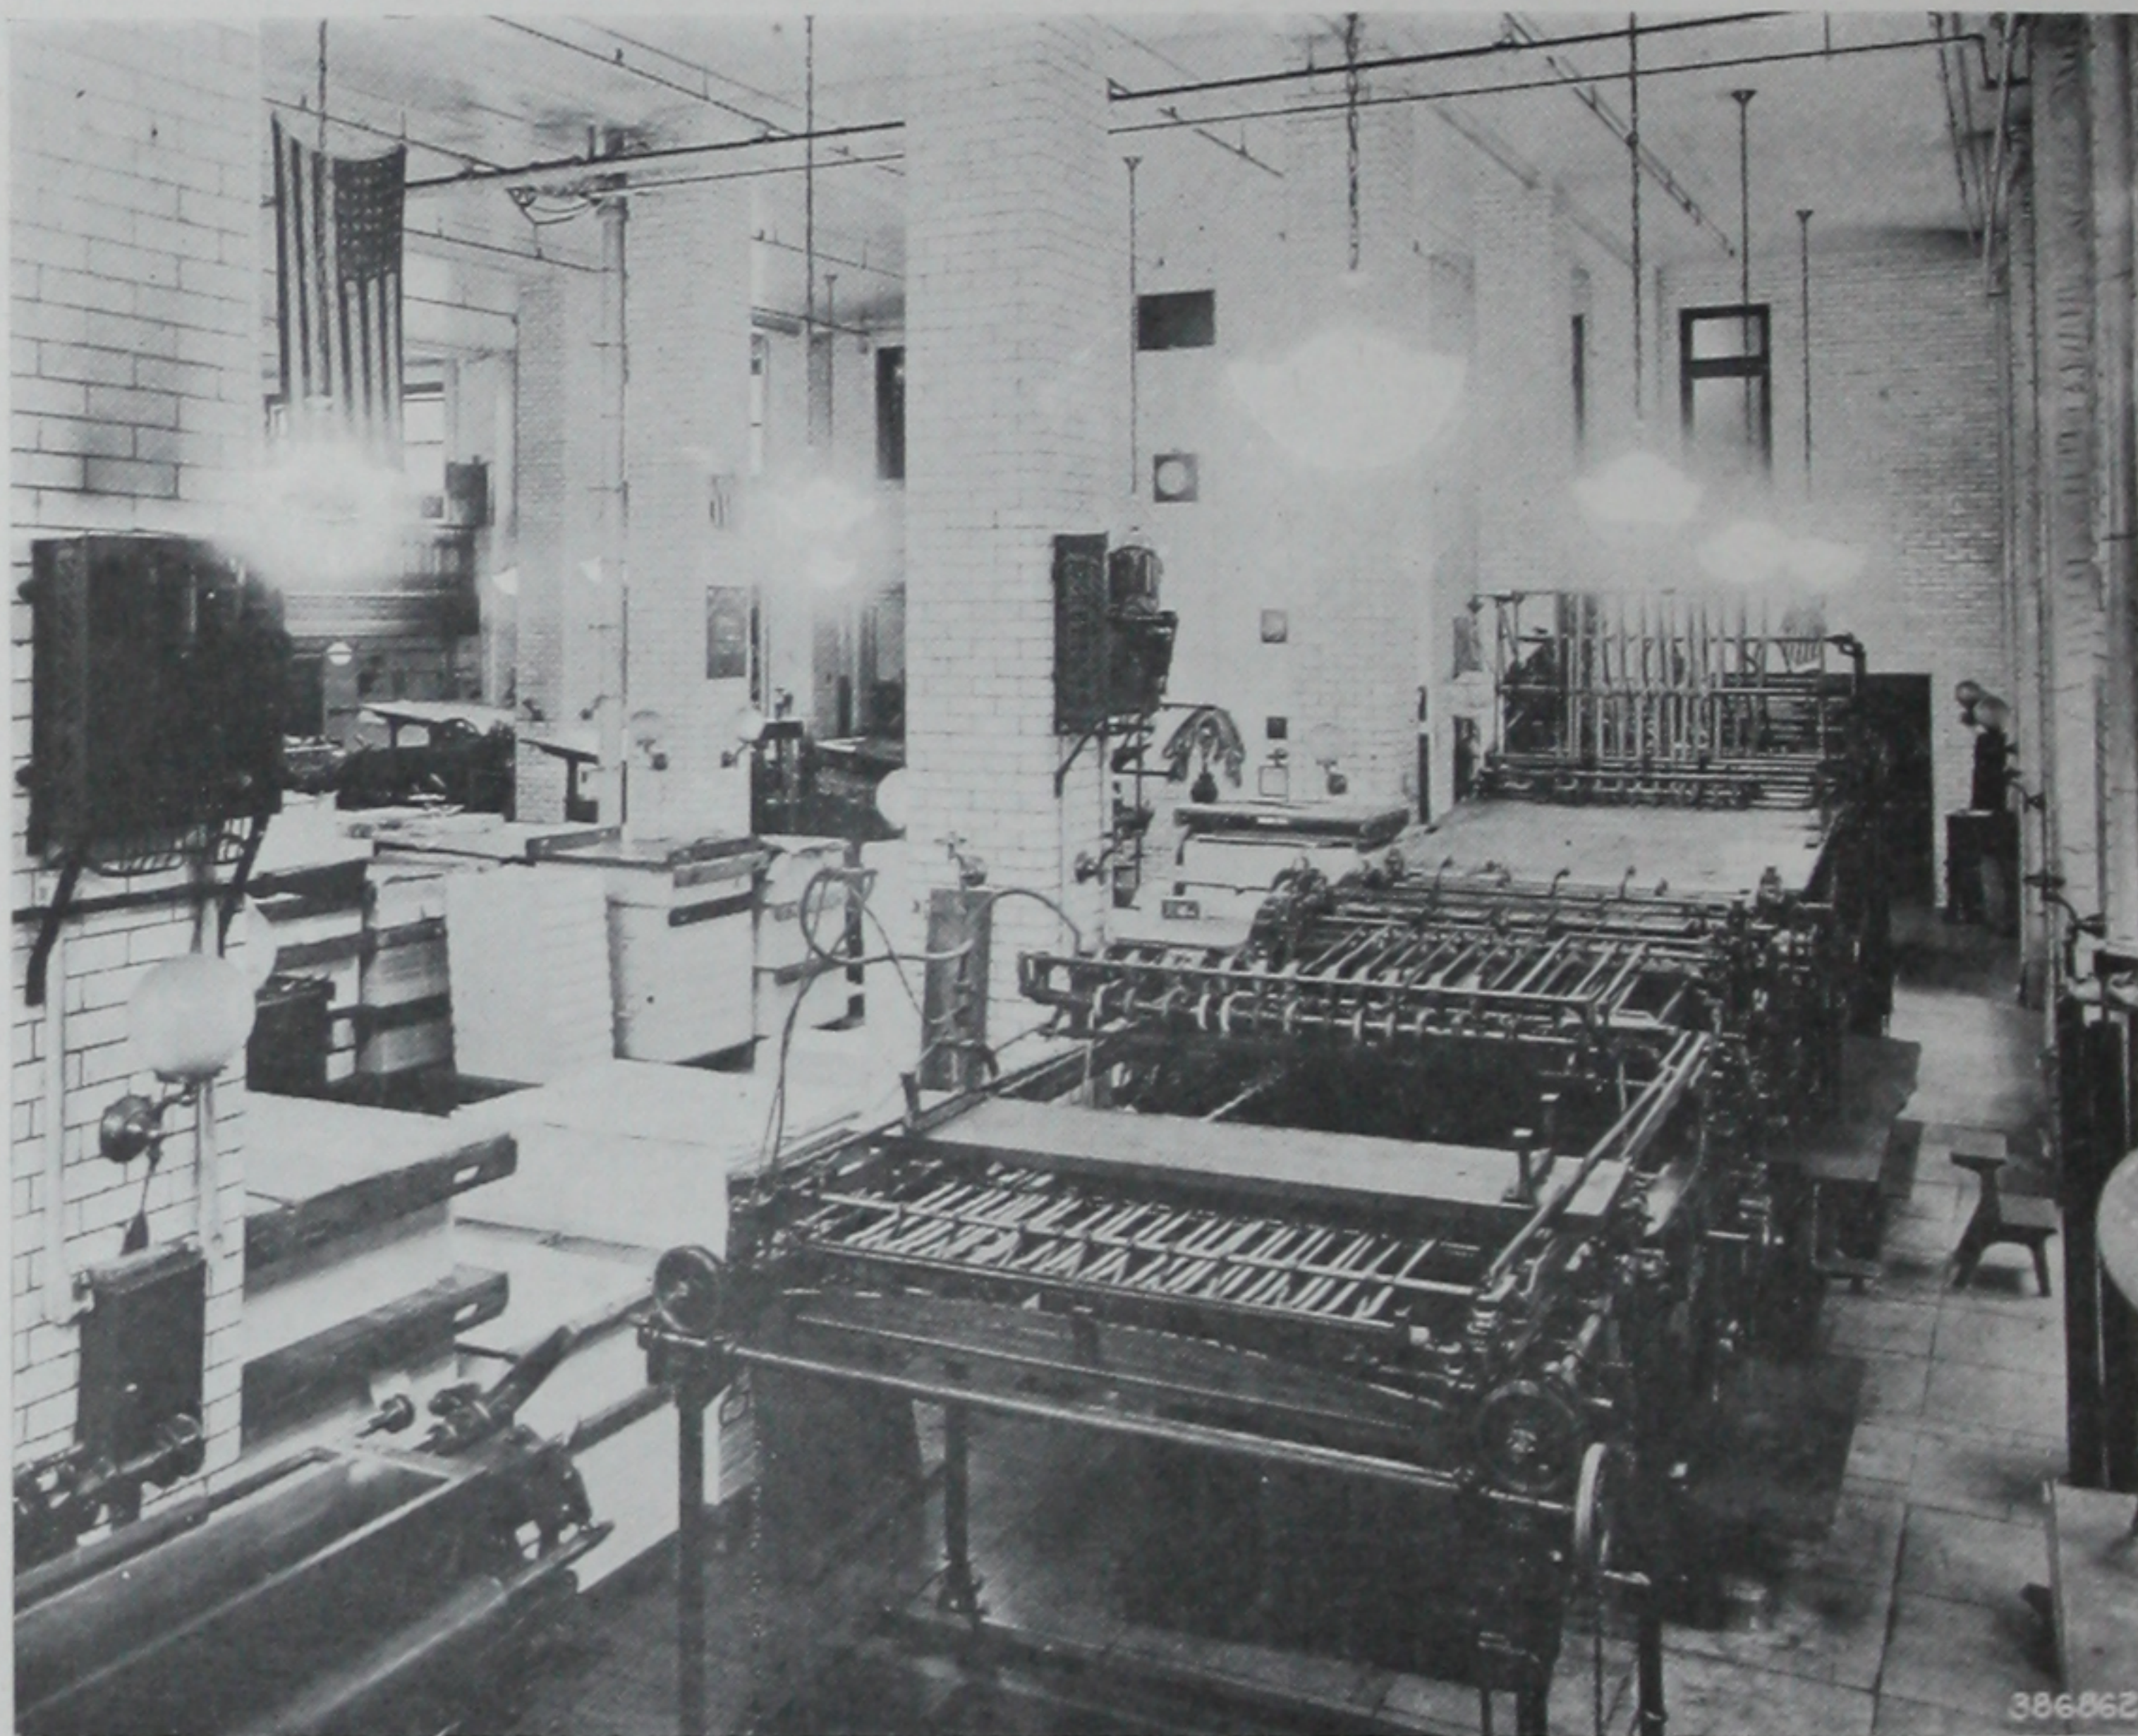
General Illumination is Provided in This Press Room by 300-watt MAZDA C Lamps in Diffusing Opalescent Glass Enclosing Fixtures. These are 16 feet above the floor on 15-foot centers. The white tile side walls and the white ceiling make possible a high intensity of illumination throughout the room, and such a remarkable degree of diffusion that the necessity for local or trouble lamps in adjusting or repairing the press is minimized
